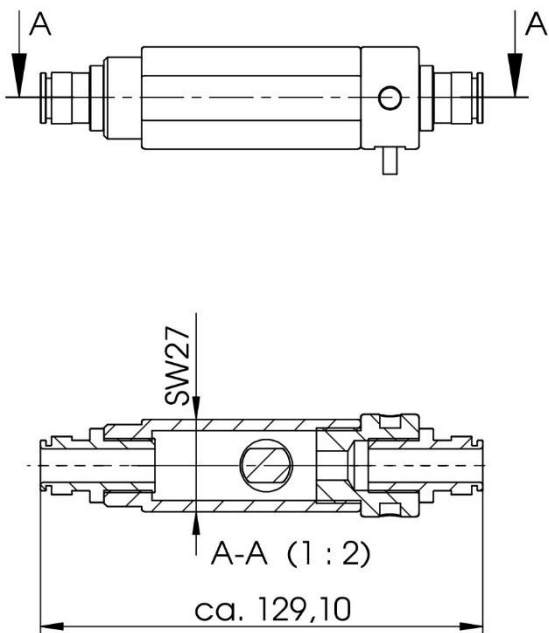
Sectional view KKTSiO-XX & KKTSiS-XX
